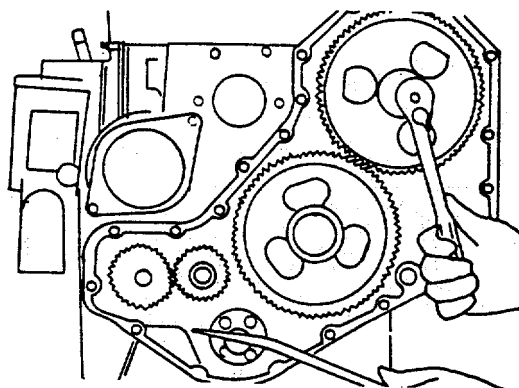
Fuel Pump Drive Gear Mounting Nut and Lockwasher Removal
